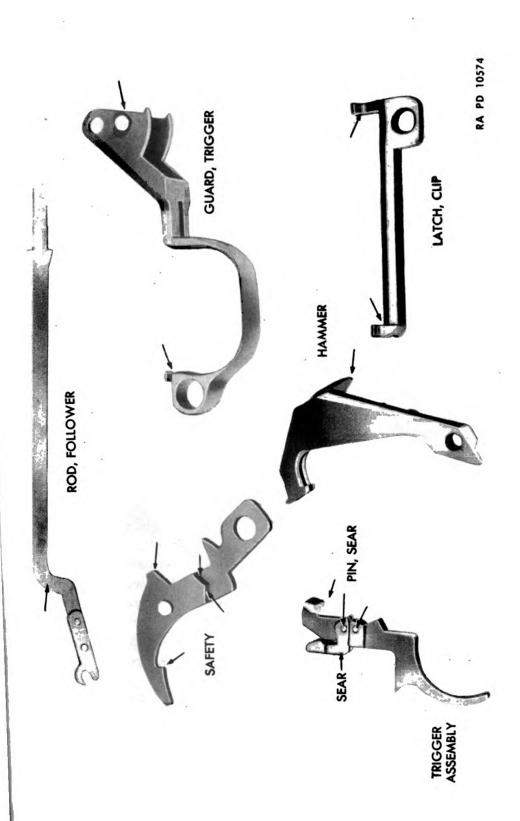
Trigger Housing Parts, Follower Rod, and Clip Latch Showing Important Points to be Inspected
